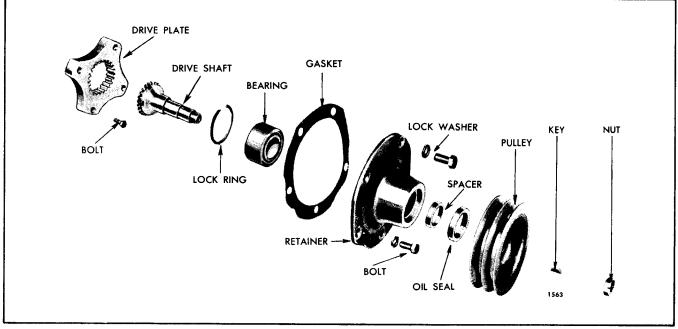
Components of Accessory Drive for Belt-Driven Accessory (Drive Plate Type)
